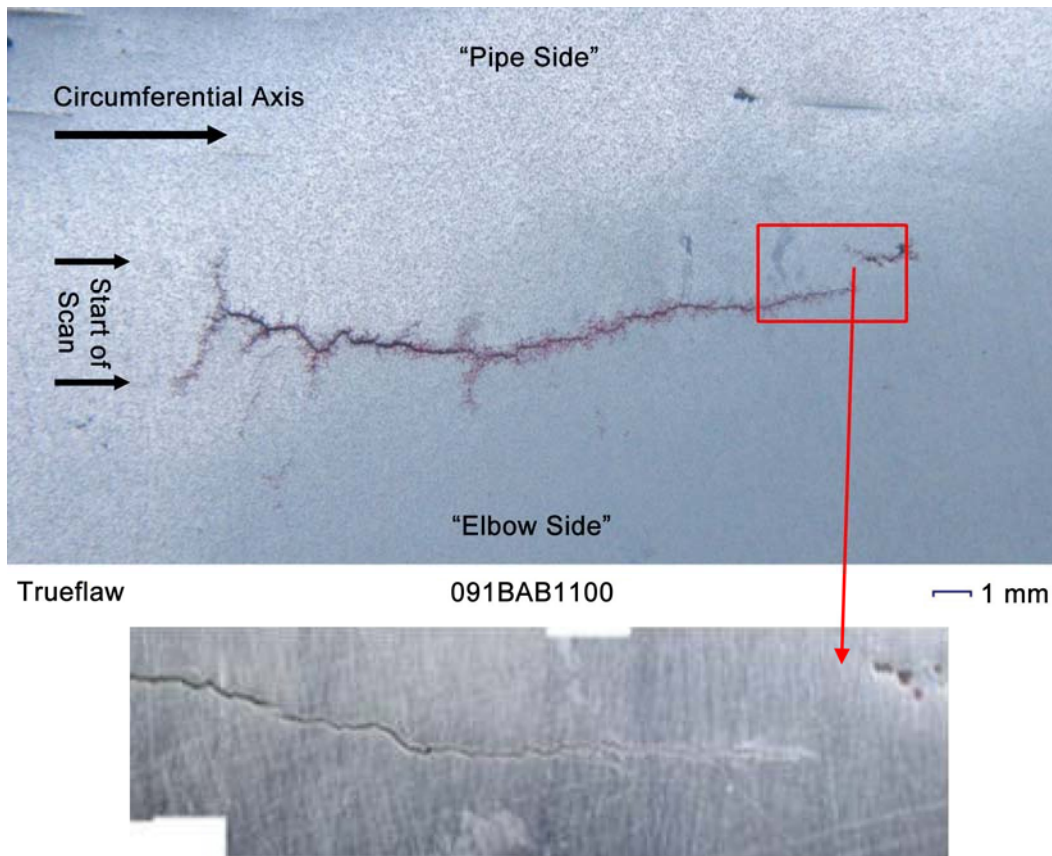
Penetrant Image of Crack 1100 in the Top and Enlarged Photograph of the Clean ID Surface in the Bottom
